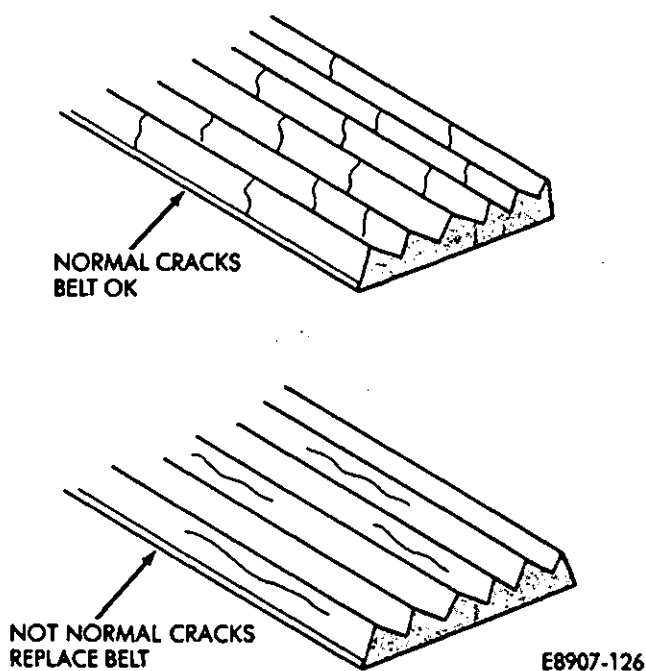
Serpentine Accessory Drive Belt Wear Patterns
